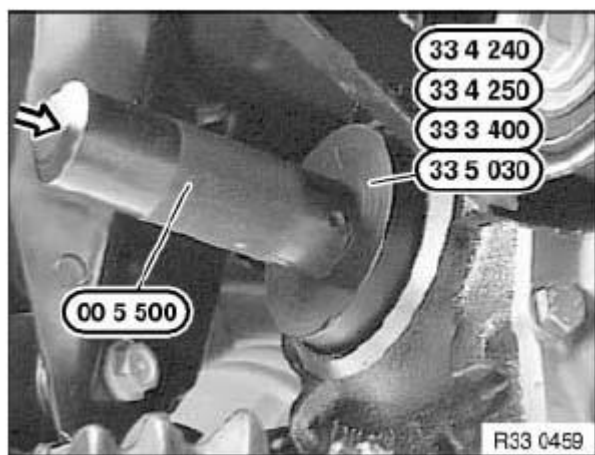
Identifying Special Tools (33 4 240, 33 4 250, 33 3 400 And 33 5 030)
